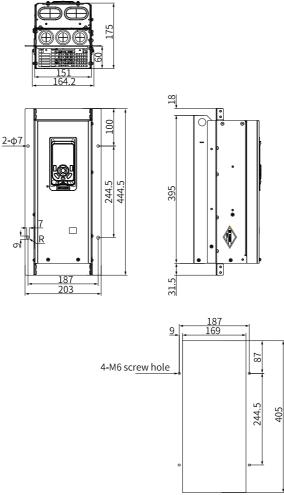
Mounting-hole dimensions (mm) of MD580-AZJ-A2T1
